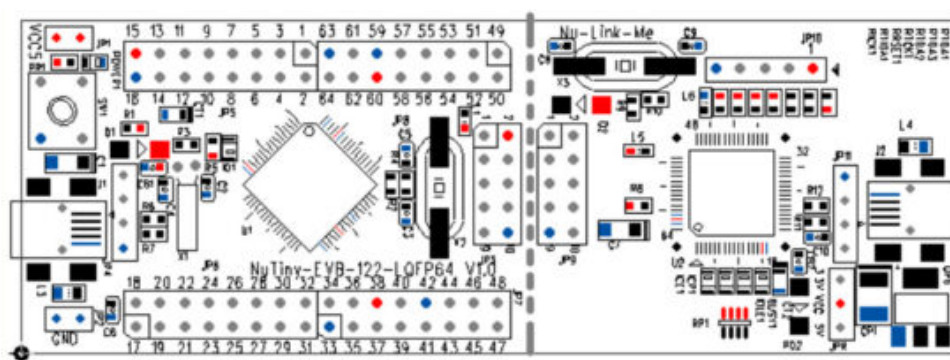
NuTiny-SDK-NUC122 PCB Placement
